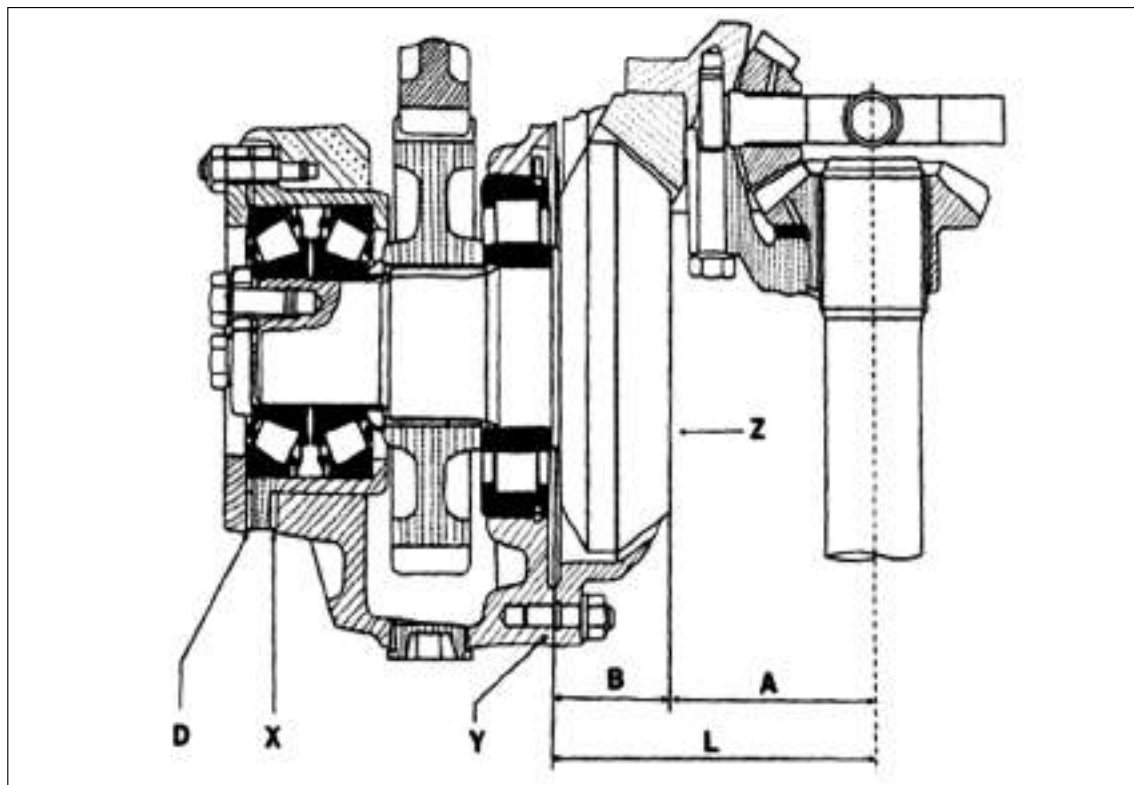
Adjustment of pre-tension degree and mounting distance of driving gear bearing
